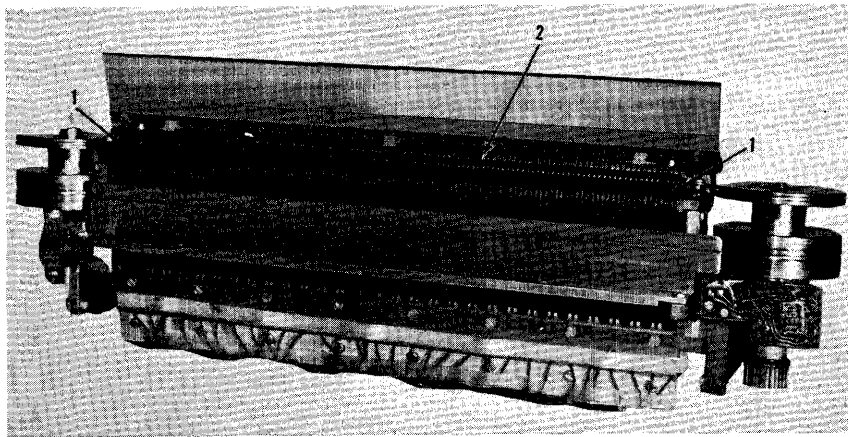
Hammer and Print Belt Assembly (Left End), TermiNet 1200 Printer
